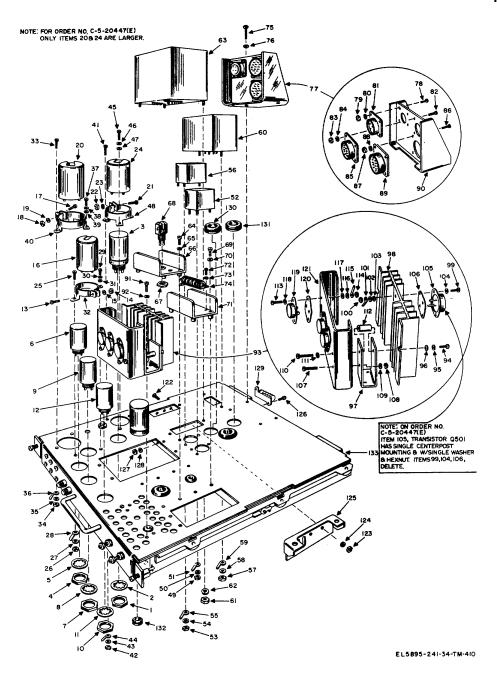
Power Supplies PP-2803/FSW-8 and PP-2803A/FSW-8 (part of OA-2055/FSW-8 and OA-2055A/FSW-8), upper drawer section, exploded view.
